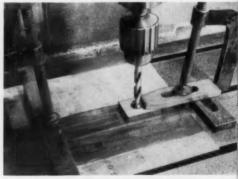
Sheet metal being drilled with "fishtail" drill guided by drill bushing in jig block clamped firmly to work surface.
